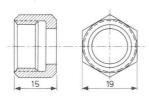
Cap nut type TE1051b (thread 3/8 in gas).
